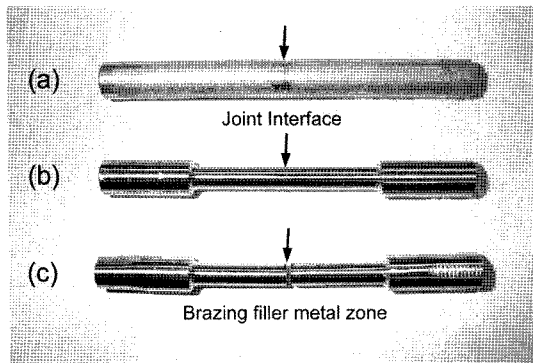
Photographs of test specimen. (a) joint made by vacuum brazing, (b) tensile test specimen, and (c) after tensile test (fracture occurred in brazing filler metal zone).
